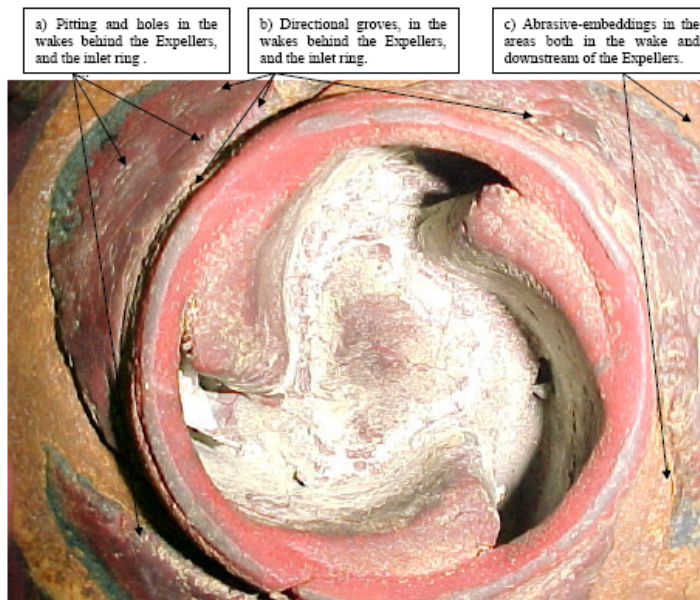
The front shroud of a rubber impeller in a small centrifugal slurry pump with common erosion patterns of directional grooves, pitting, and the abrasive embedding.
